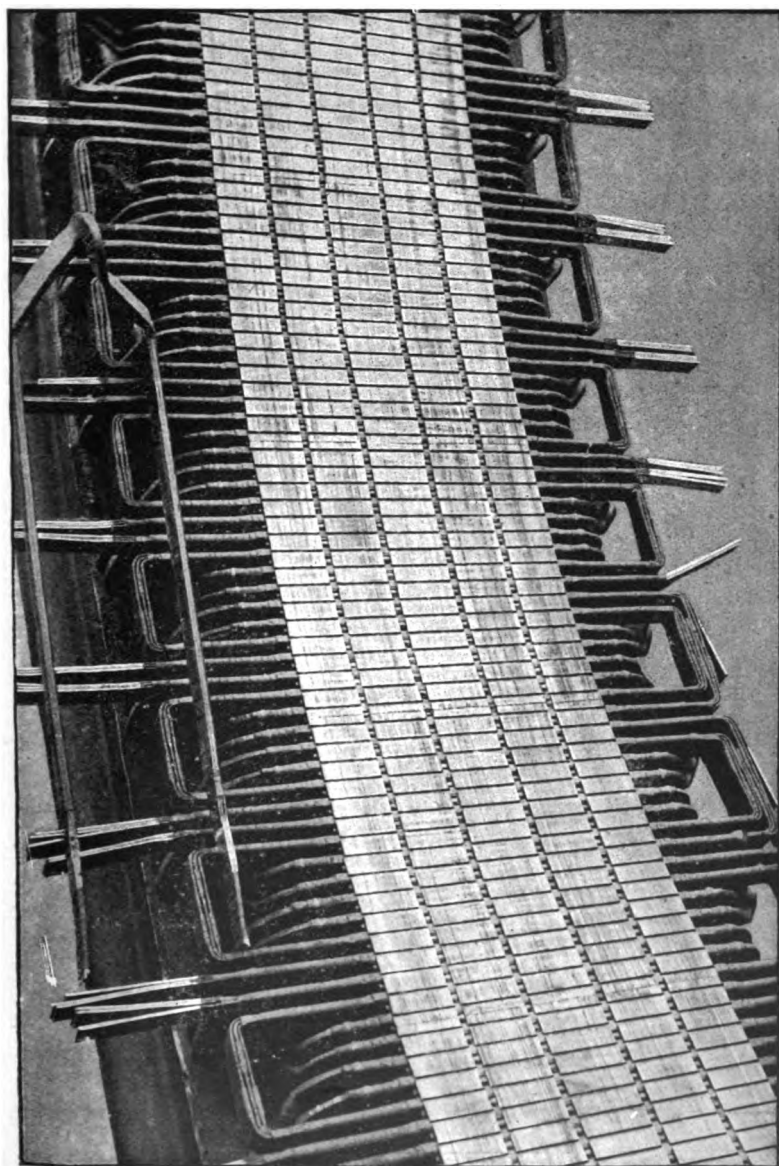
TWO-SLOT WINDING FOR 800 KW THREE-PHASE MACHINE.
